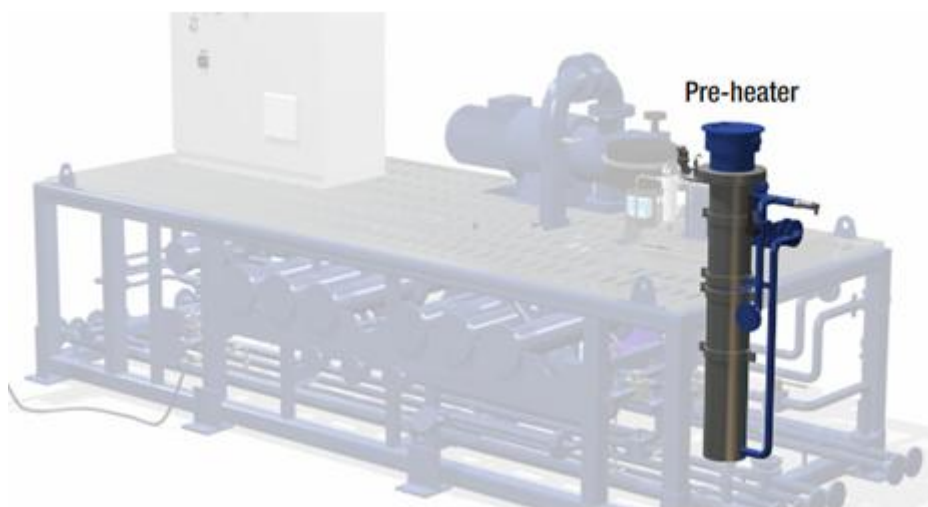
Pre-heater installed on the engine auxiliary module /14/
